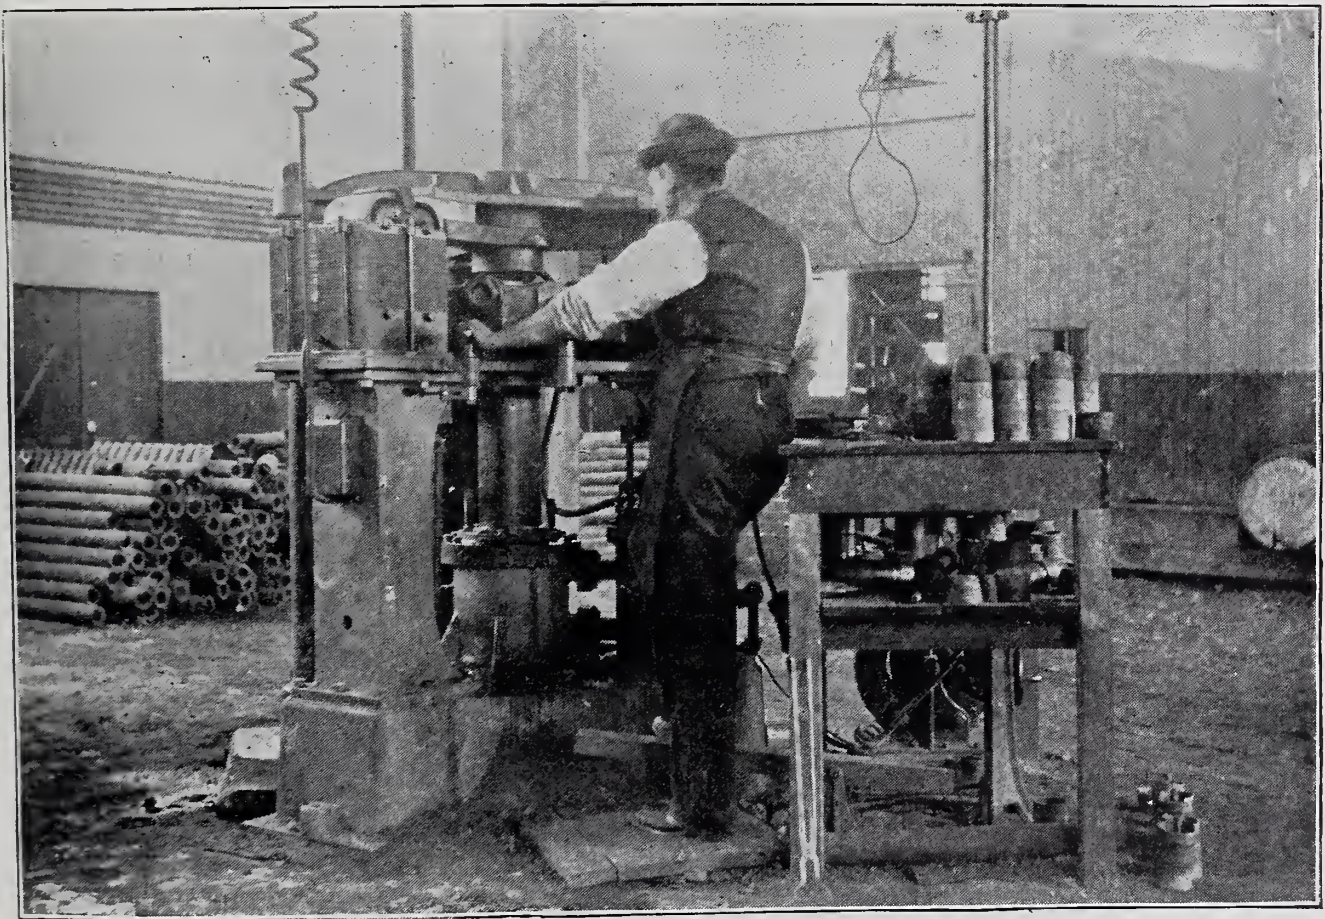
ELECTRIC WELDING MACHINE FOR SMALL PROJECTILES.
